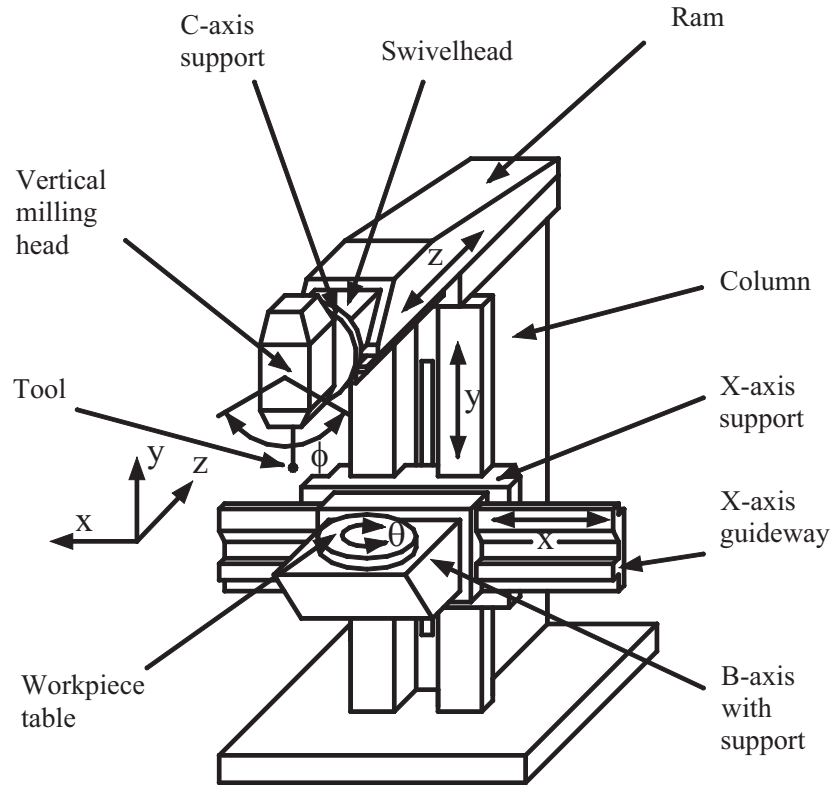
Schematic drawing of a Maho 700S five-axis milling machine and its main components with accompanying reference frame.
